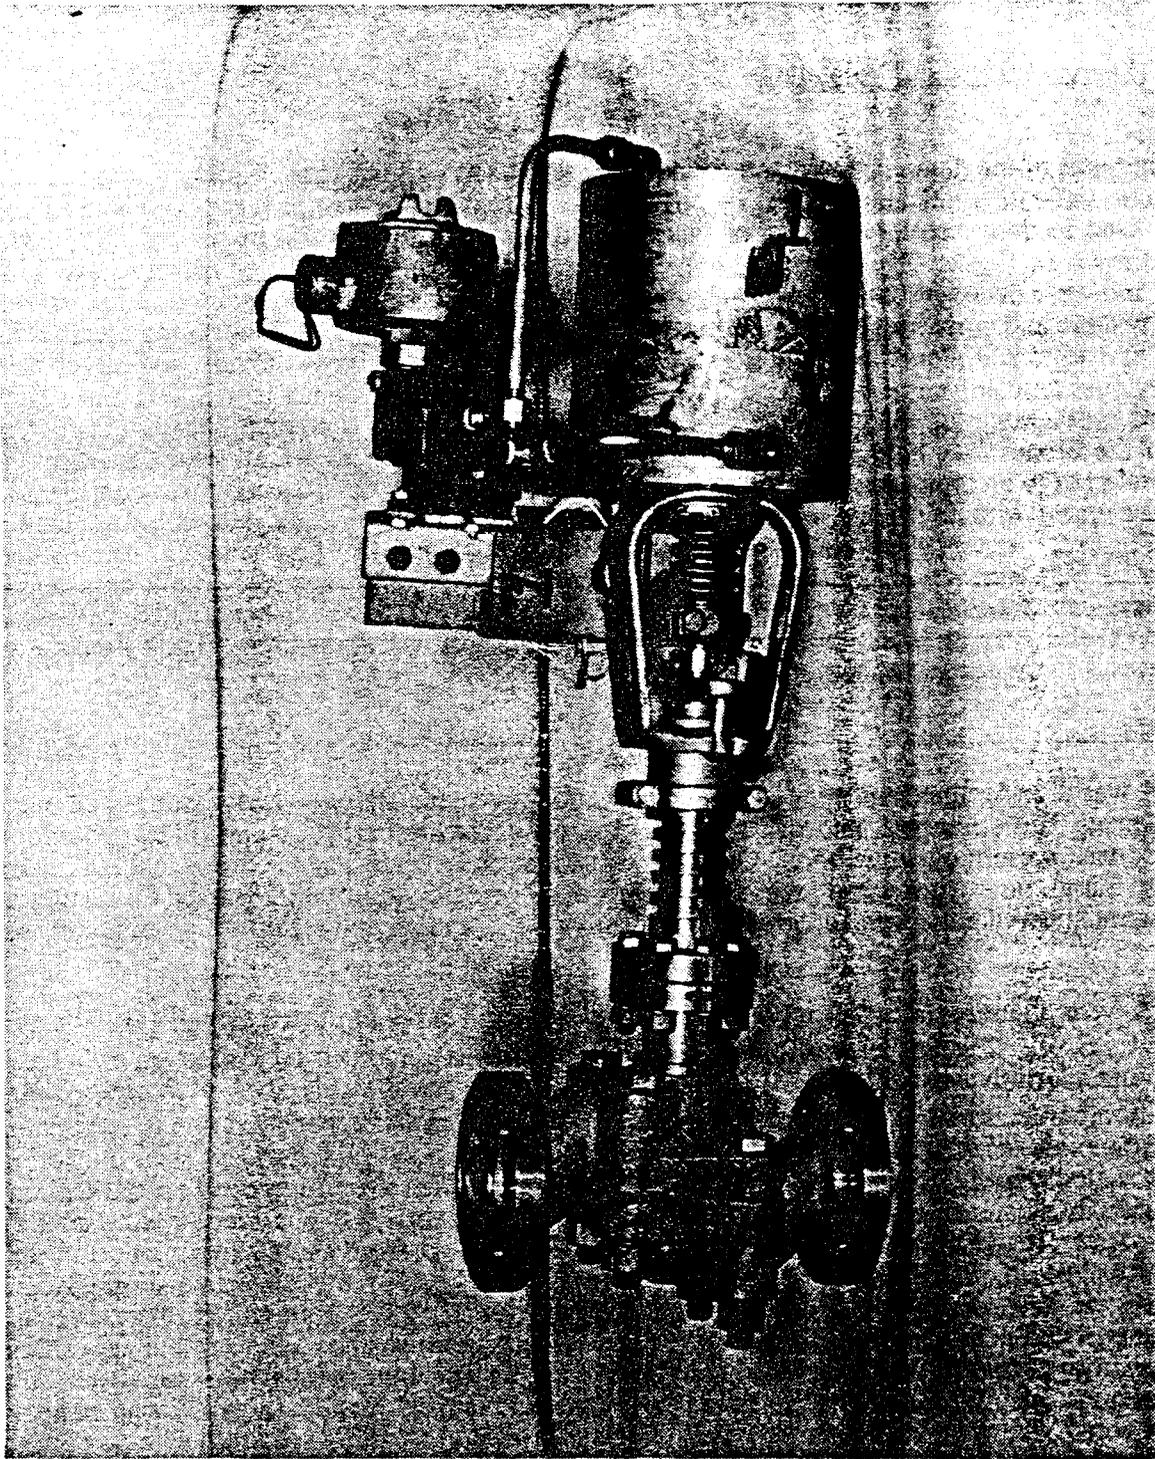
VALVE ASSEMBLY PRIOR TO CLEANING
